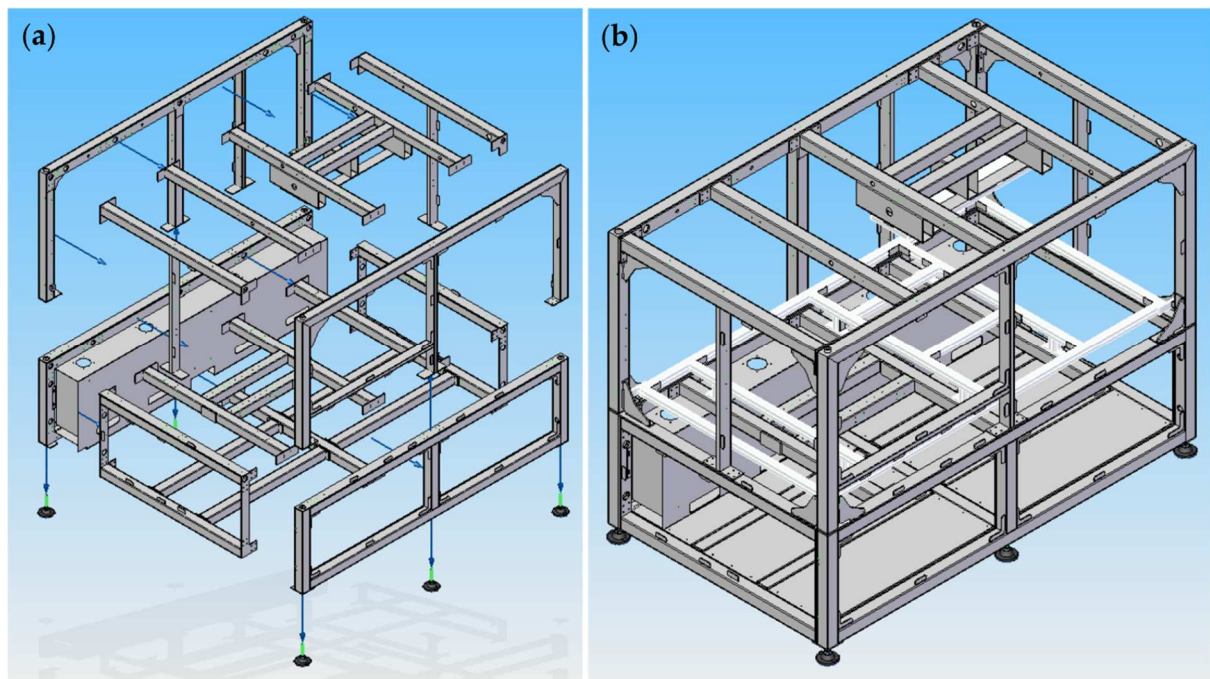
(a) Welded parts to be mounted to constitute the frame. (b) additional elements, such as supporting plates in the lower part, the gusset plates, the plane of aluminium profiles and the fixture plate for the *RH1F* robot.
